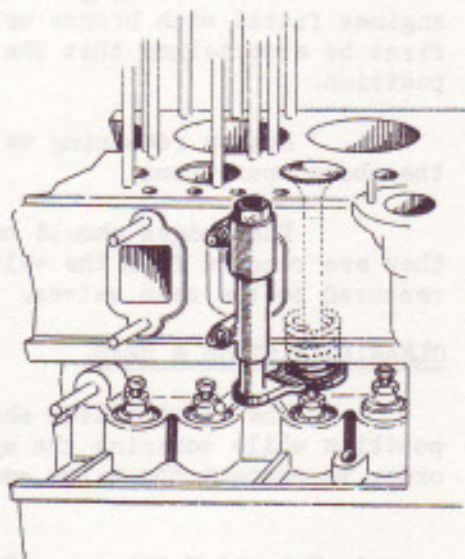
EXHAUST VALVE SPRING COMPRESSING TOOL IN POSITION.
